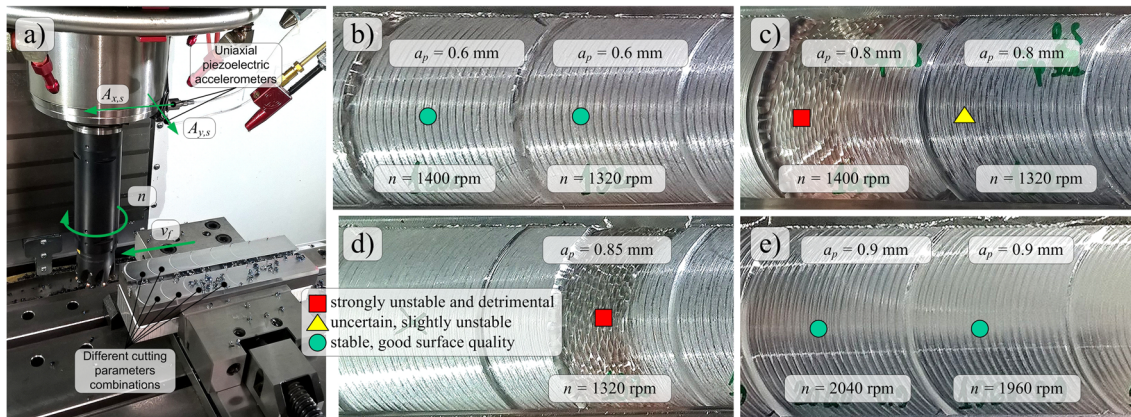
Experimental setup for chatter tests and examples of machined surfaces under different cutting parameters combinations
